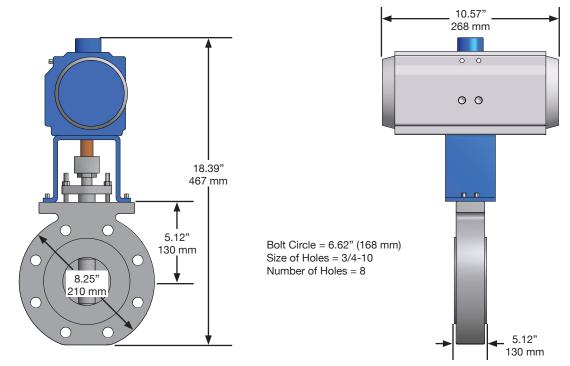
Pneumatically Actuated Wafer Valve Dimensions
